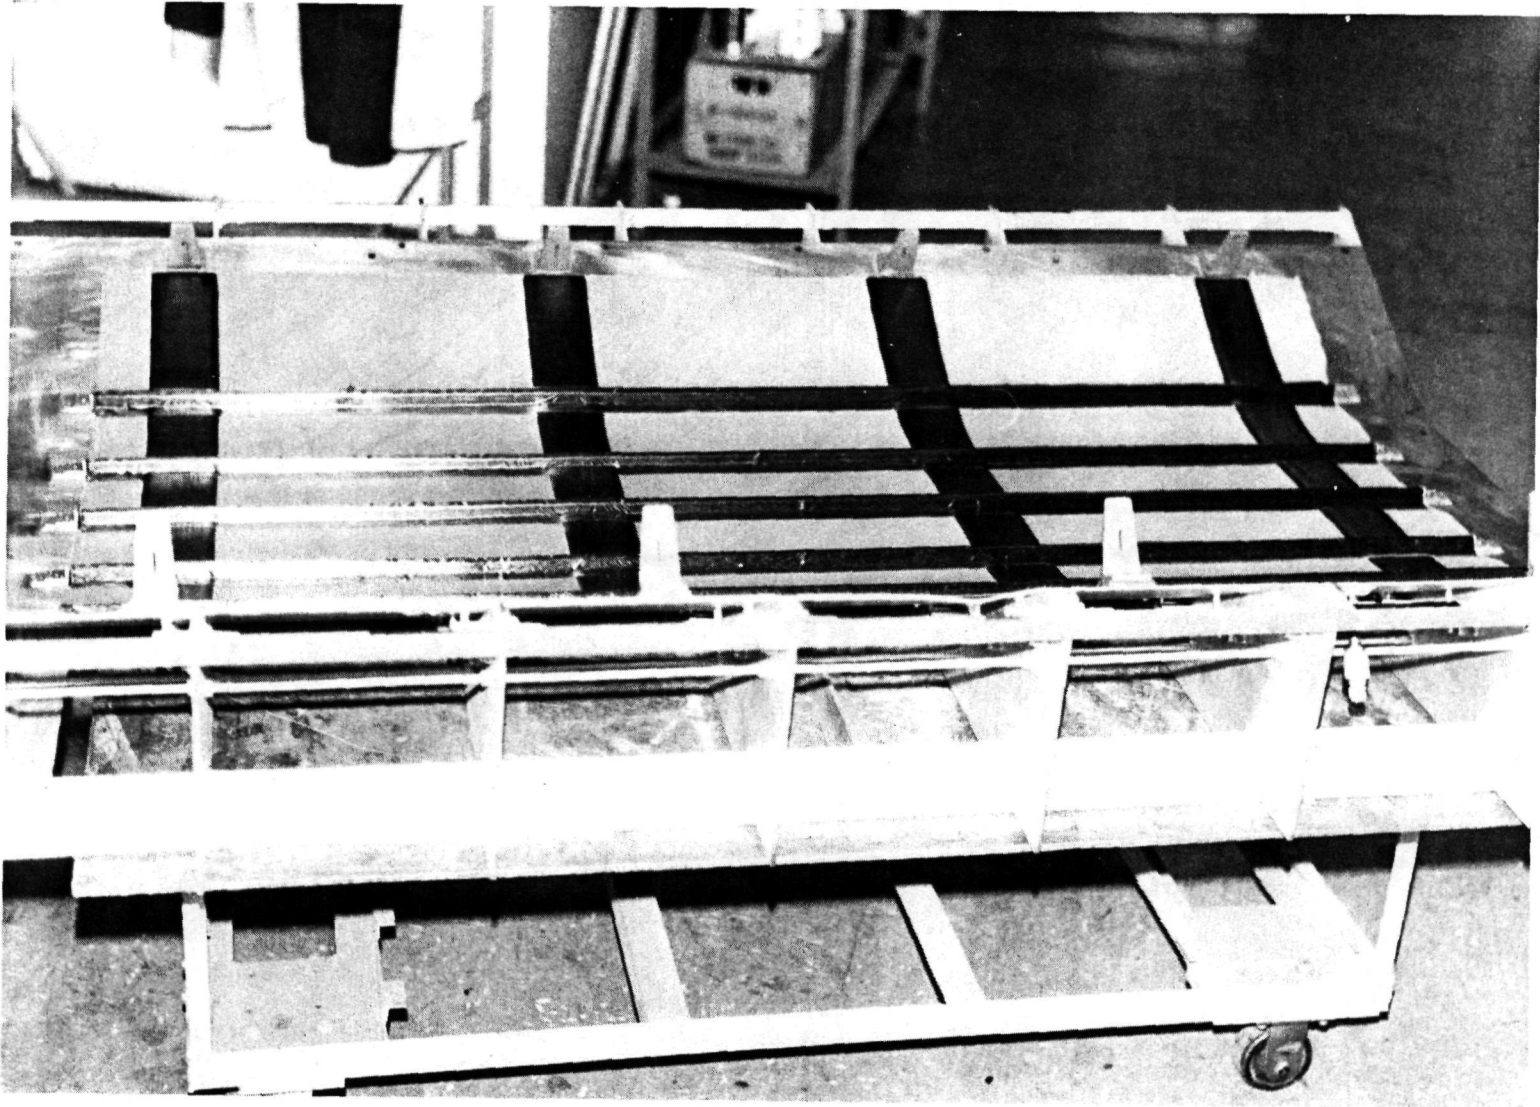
EWR 32381 COMPOSITE SHELL SECTION LAYUP, WITH SKIN, LOWER CAP, AND STRINGER LAMINATES IN POSITION.
